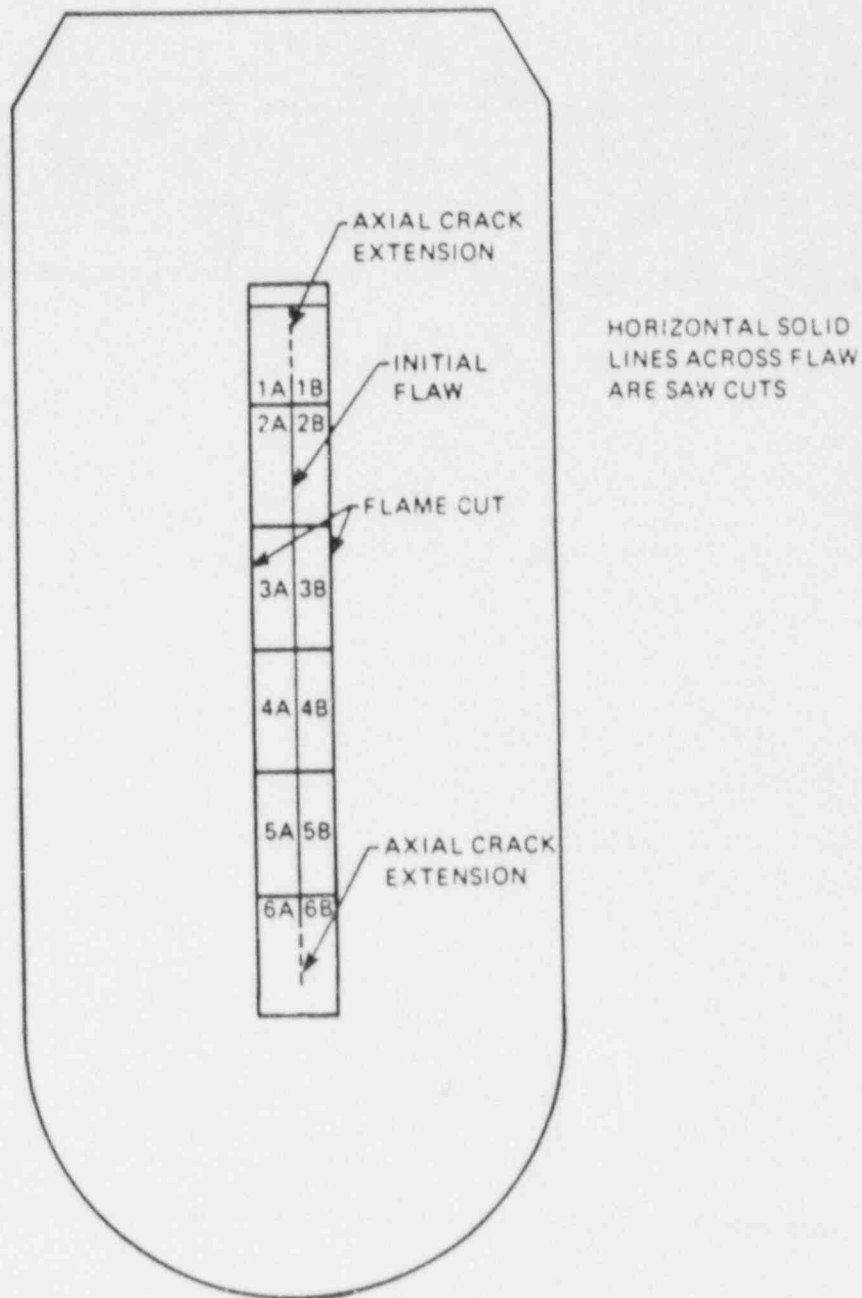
Scheme for cutting and labeling PTSE-2 fracture surfaces. Surfaces labeled A are viewed toward left and B, toward right.
